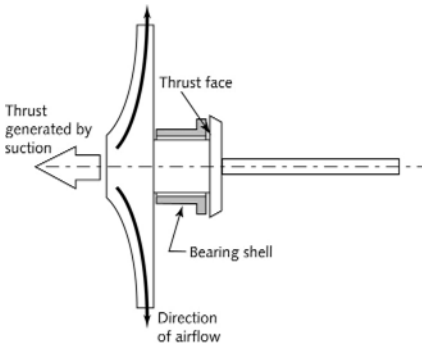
Schematic arrangement of the high-speed shaft and bearing
